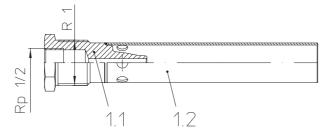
Steam injector - series 651 PN25 internal thread Rp 1/2 and external thread R1
